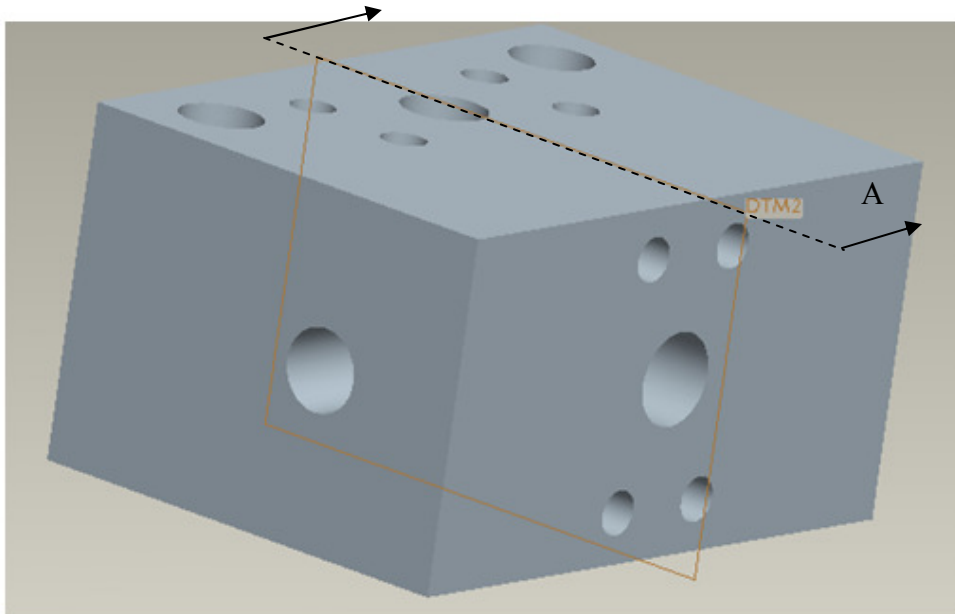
CAD drawing of the test valve provided from Amsted Rail and its internal features. (All the dimensions are in inches)
